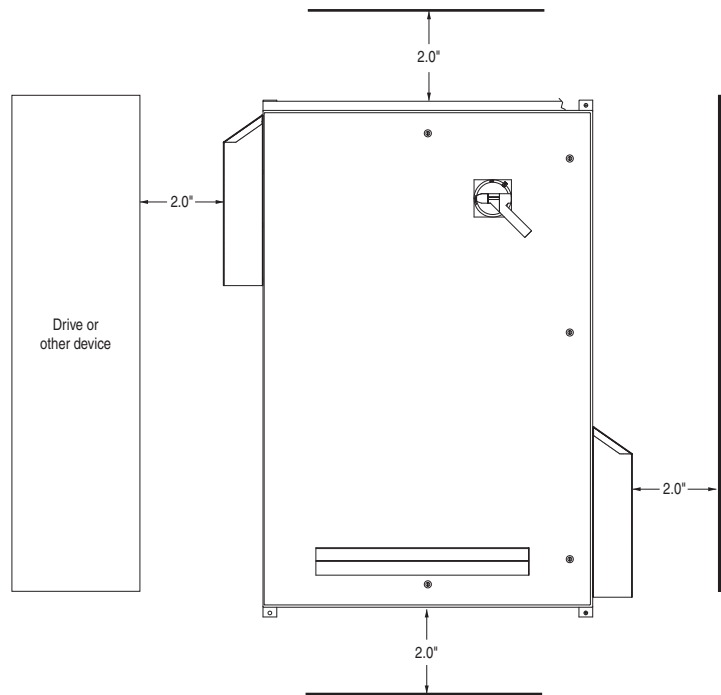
NEMA/UL Type 12 Minimum Mounting Clearances
